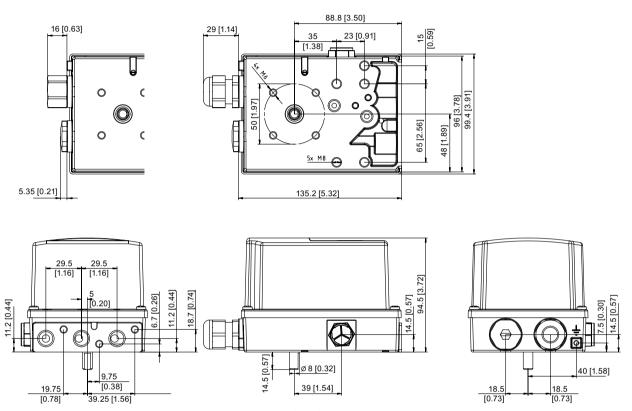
Dimension drawing, dimensions in mm (inch)
